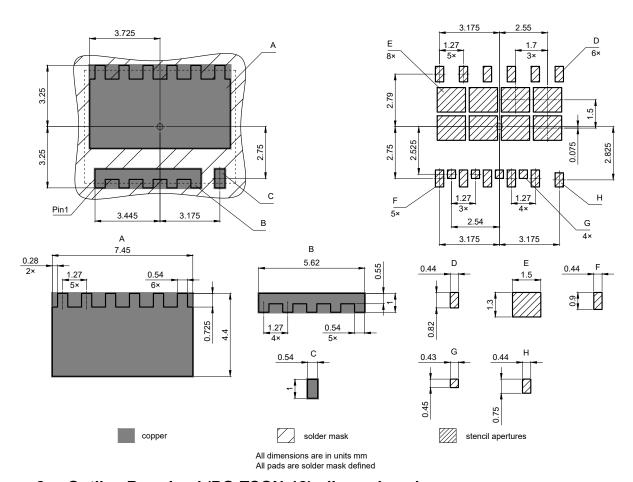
Outline Boardpad (PG-TSON-12), dimensions in mm
